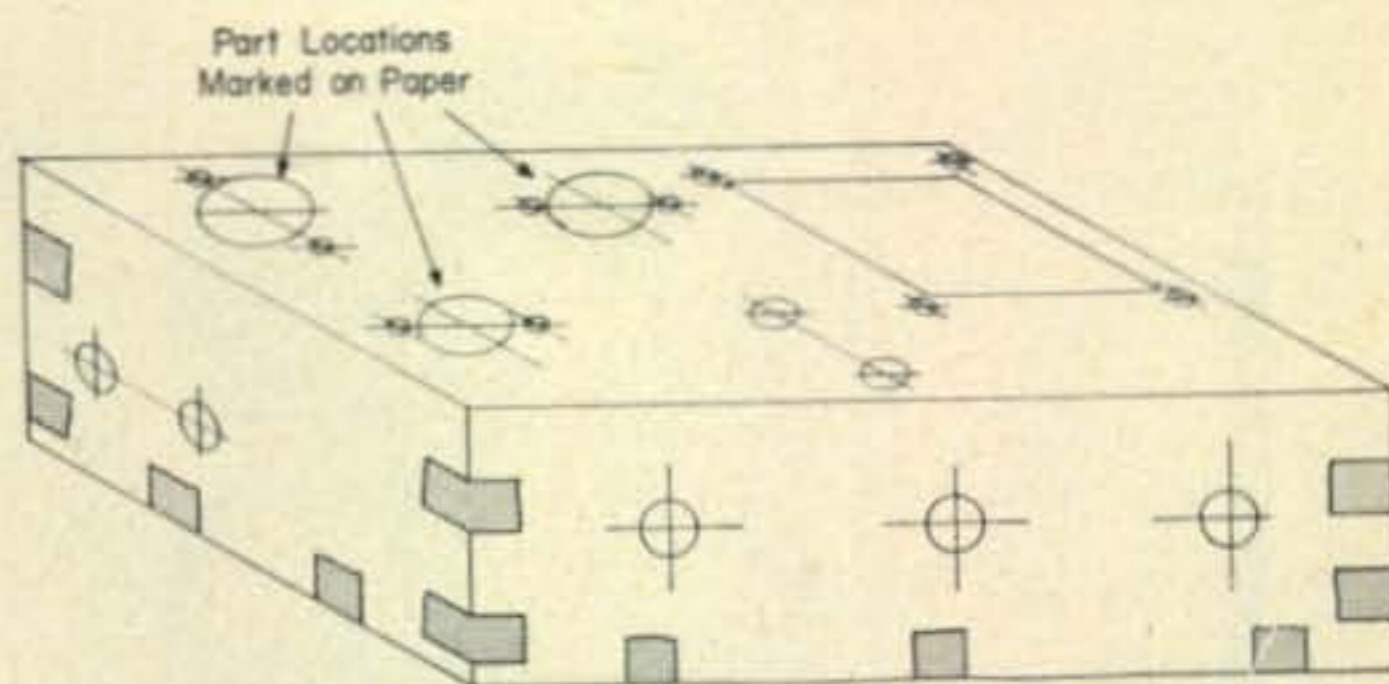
Paper mask folded over chassis and held tightly with adhesive tape. Location of components may be marked on mask without marring chassis surface.
